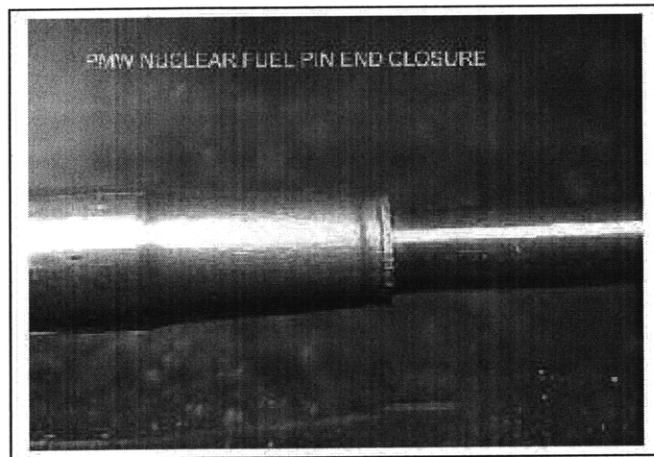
Photograph of an electromagnetically welded nuclear fuel pin end closure [57].
